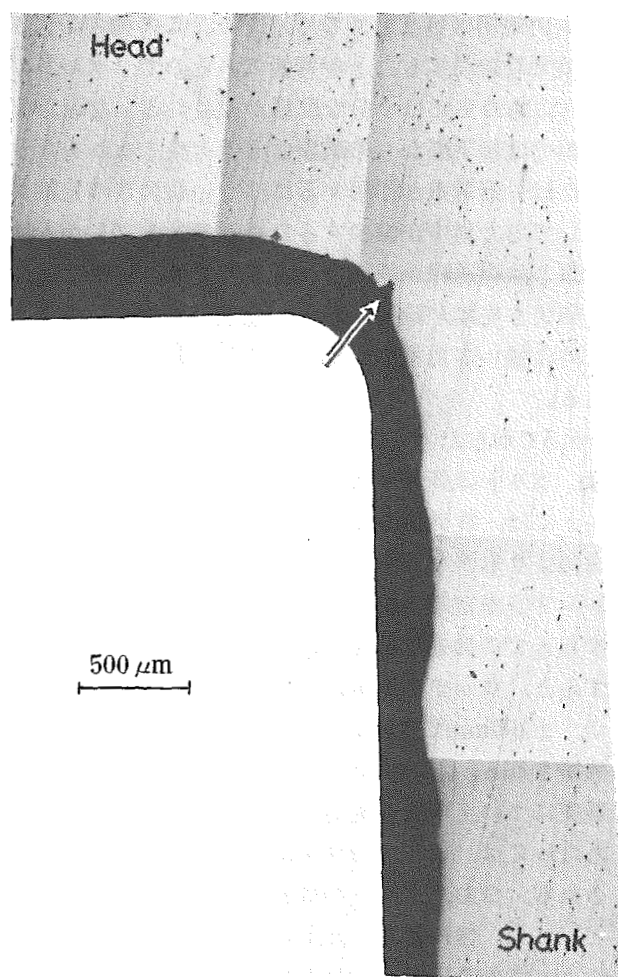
b Micrograph of unetched section through head-to-shank radius. Arrow indicates a notch formed by machining.
